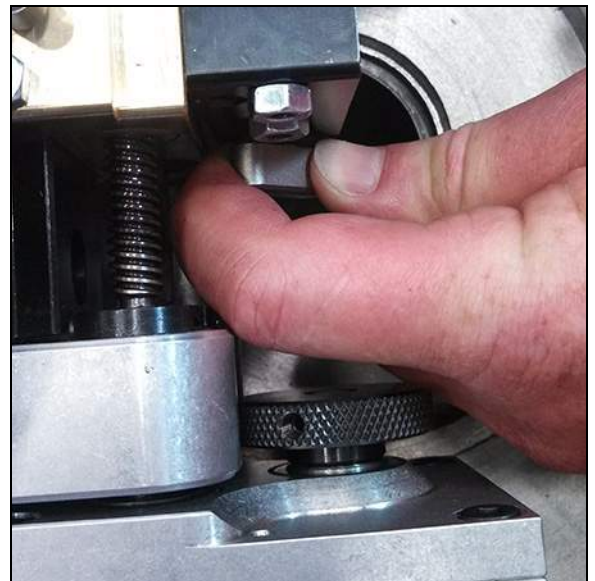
AXIAL GIB LOCK SCREW (FF1200 SHOWN)
